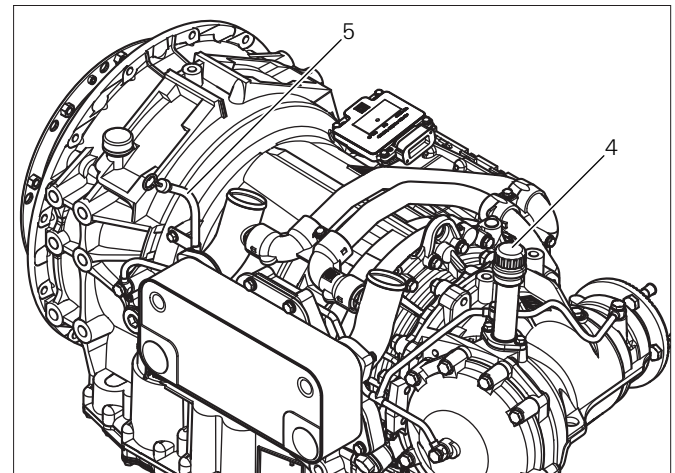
Transmissions with angle drive of 80°, RHD
